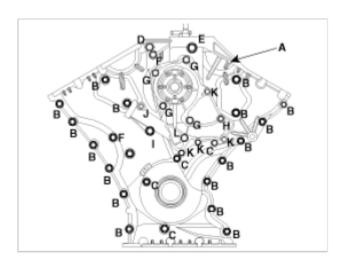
Identifying Cylinder Block Mounting Dowel Pins Tightening Sequence
